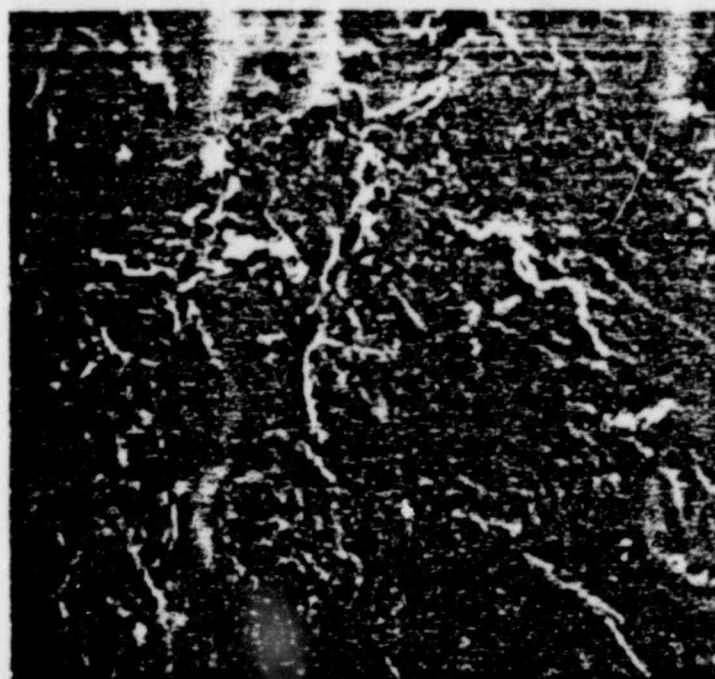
Fractograph showing portion of locus of crack initiation (corner of keyway).
